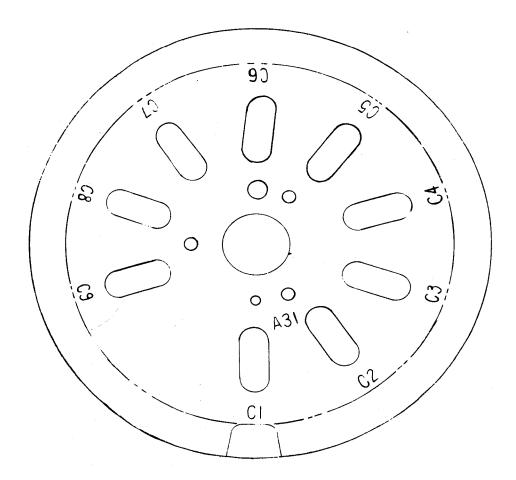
10 kHz Rotor Subassembly A2A4A31, Component Locations
